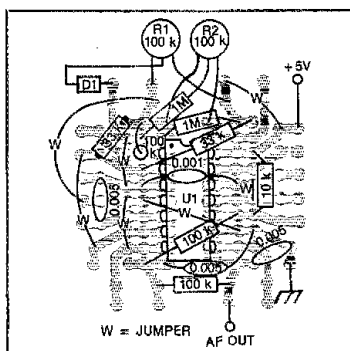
Parts-placement diagram for building the AFSK modulator on a Radio Shack Universal DIP Board.
